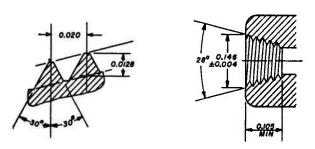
Thread details for shutter cable release tip and socket with taper (European) thread (60 tpi).
